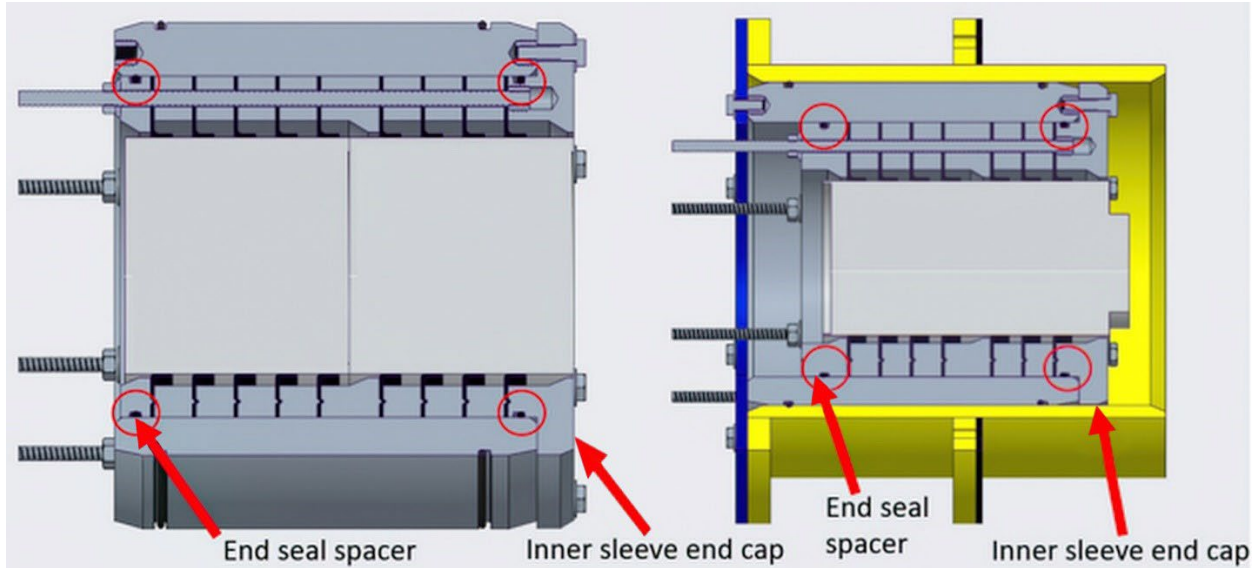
(Left): Modified Tested Shield Can Inner Sleeve; (Right): Modified Tested Blend Can Inner Sleeve Inside Outer Sleeve Weldment
